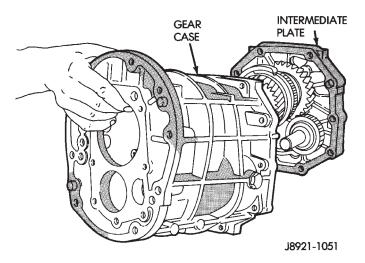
Install Transmission Gear Case to the Intermediate Plate
